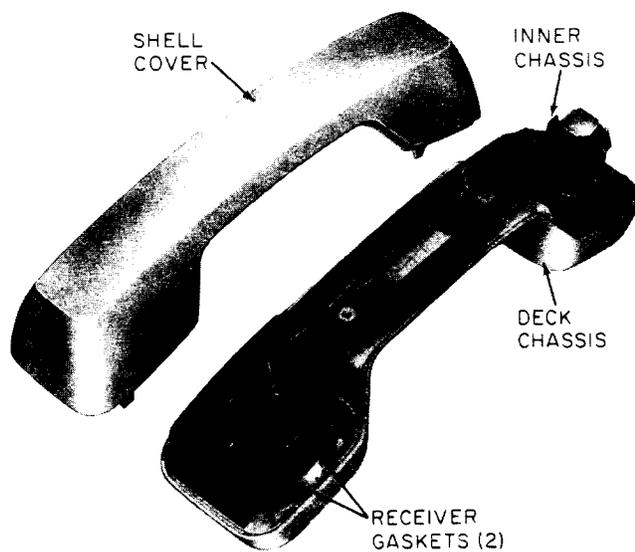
K2D Modular Handset Showing Location of Receiver Gaskets
